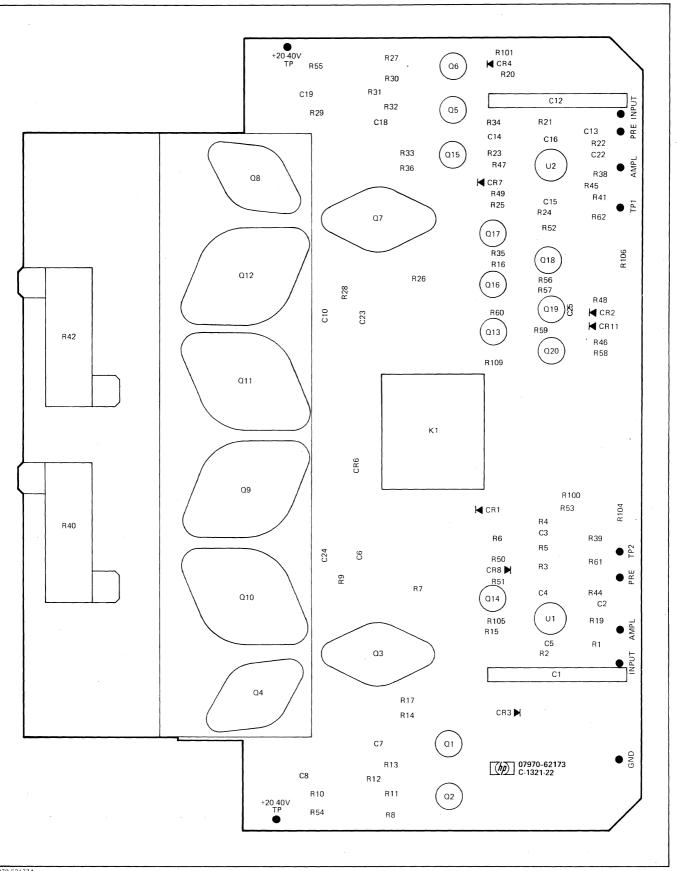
Reel Servo PC Assembly A7 (Sheet 1 of 2)
